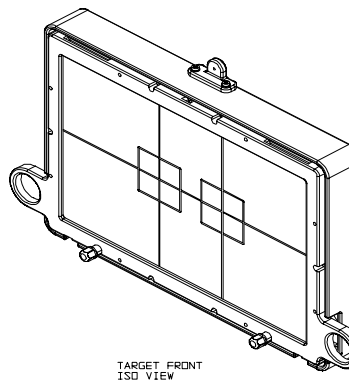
EBCS TARGET ASSEMBLY
